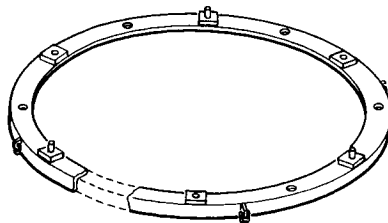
Universal Mounting Ring, Flight Spacecraft and Planetary Vehicle
